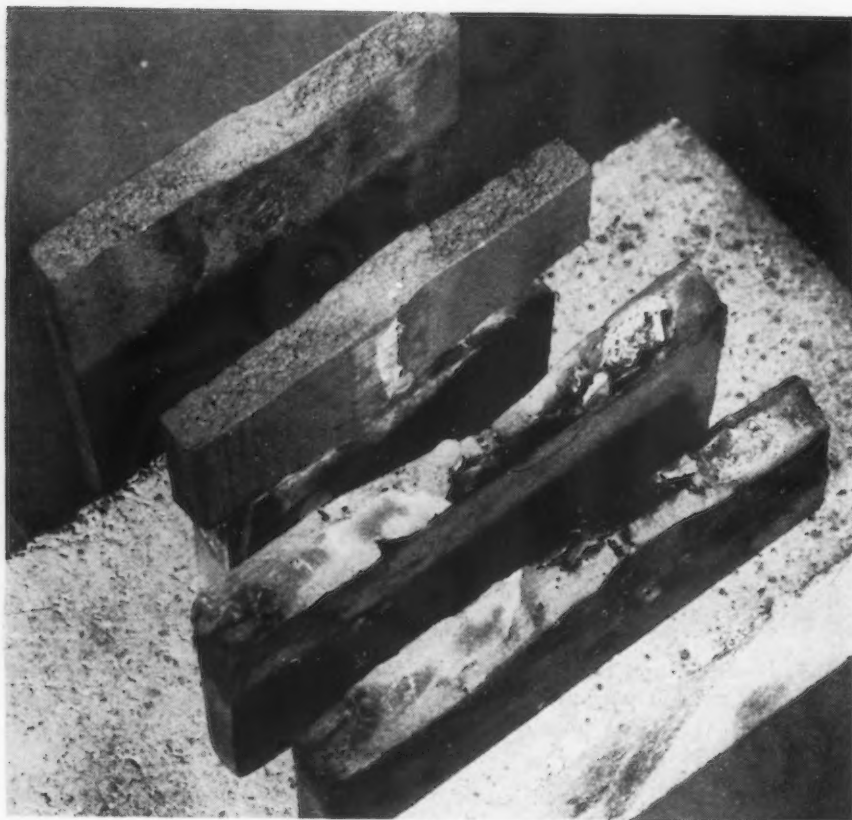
Fractured welds show good and bad practice. All photographs courtesy Linde Air Products Co.
